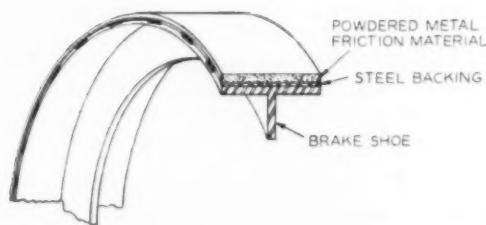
TACK-WELDED BRAKE LINING
